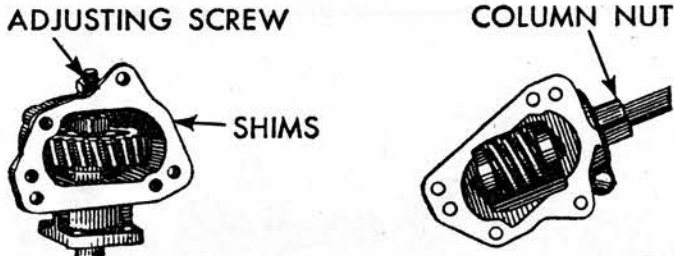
Steering gear adjustments. Series A, B, D, G, H with wide spread front wheels
